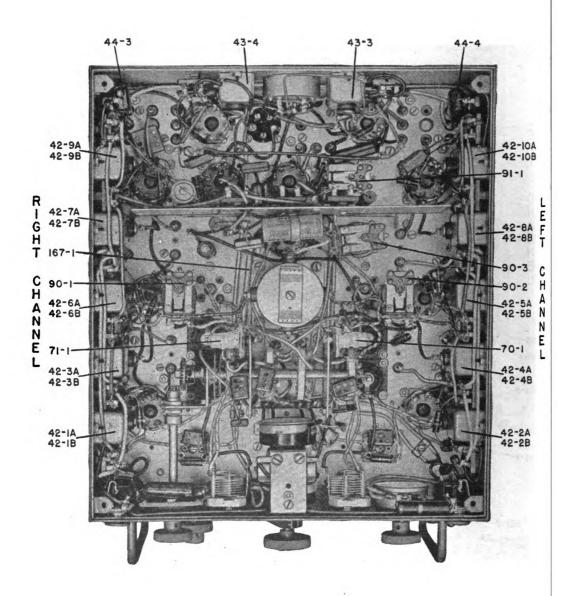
Chassis of Radio Receiver BC-973-B, bottom view showing location of parts.
